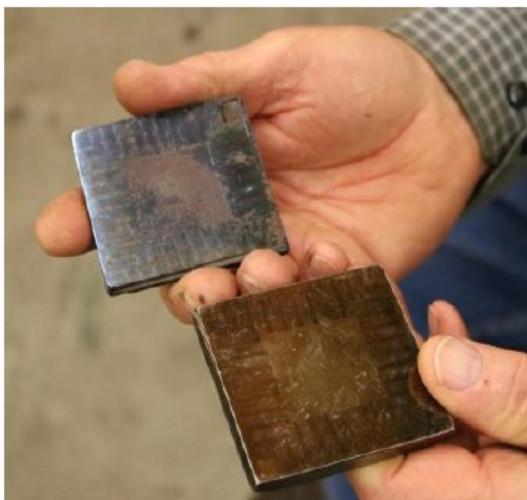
Cut off box ends showing an example of a different pattern by packing layers perpendicular to each other.
